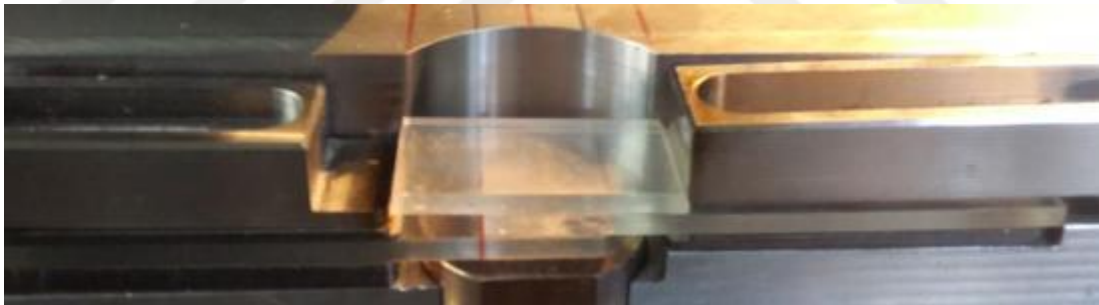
The position of PC sheets in the welding apparatus (Personal archive, 2017)
